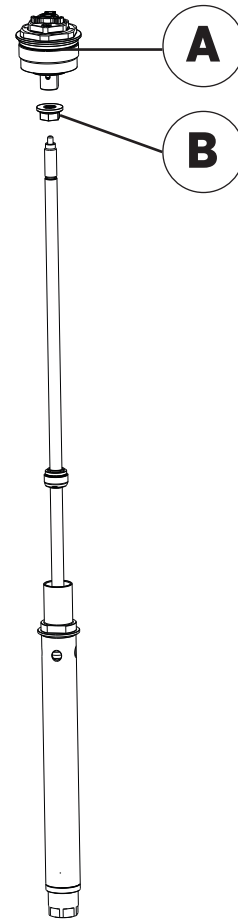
Remove top cap assembly, cinch nut and packaging.
